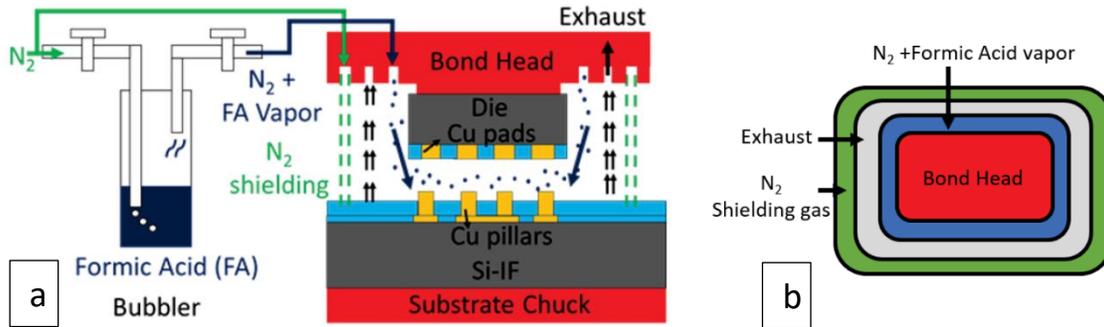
schematic of the tool setup showing the formic acid bubbles and bond head (a), top view of the bond-head showing the three channels for shielding N₂ gas, exhaust, and formic acid vapor (b) [6].
